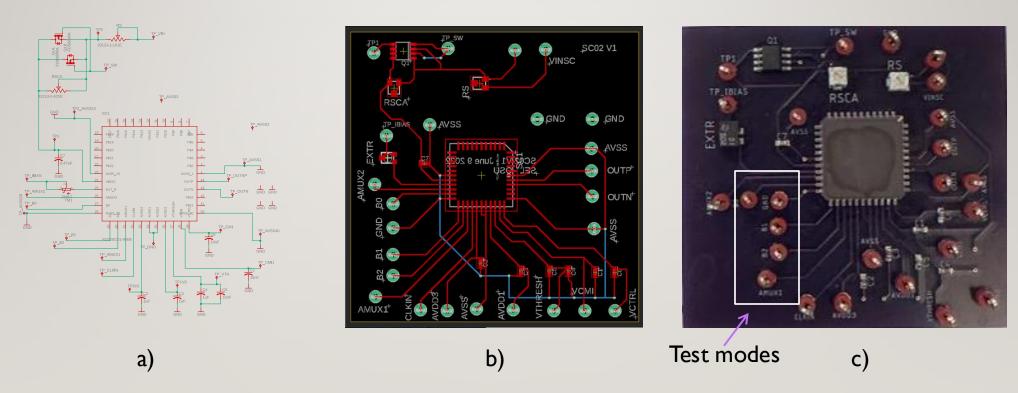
PCB for second chip a) Schematic b) Board layout c) Fabricated PCB
